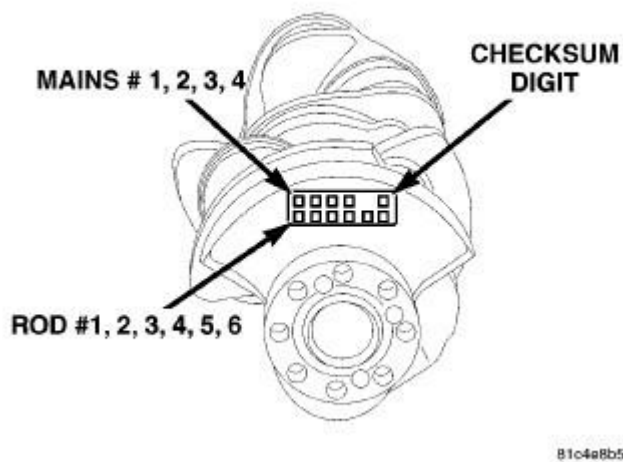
Crankshaft Main Journal Grade Marking Location-Rear Of Block
